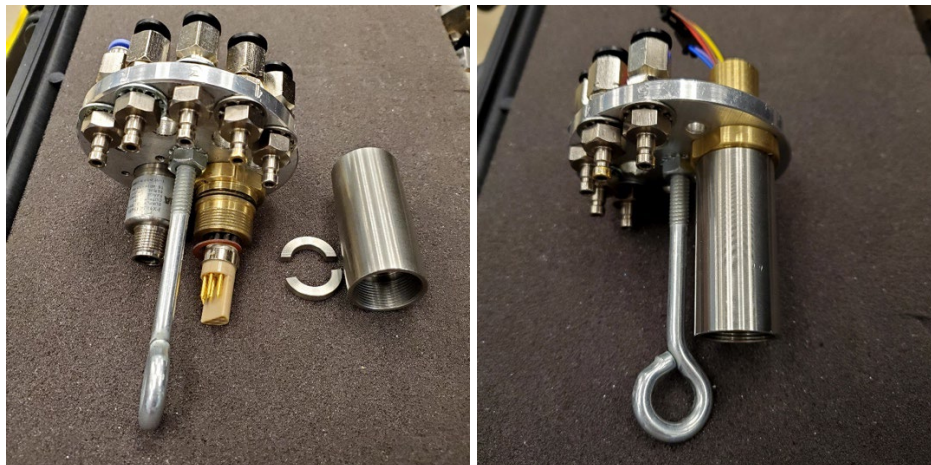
Brass feedthrough connector and adapter tube for CPT cable connector disassembled (left) and assembled (right)
